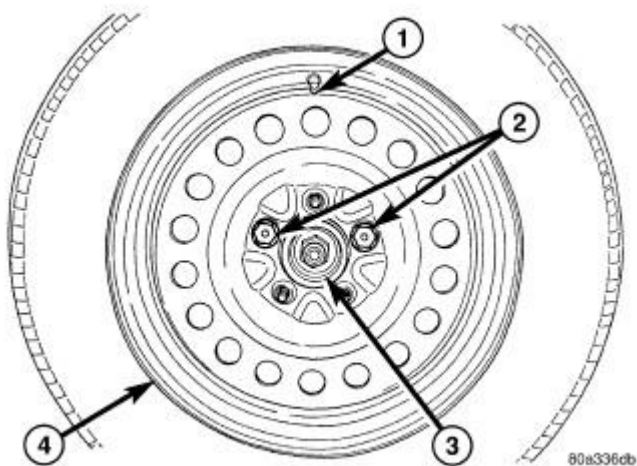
Valve Stem, Nuts, Hub And Wheel
